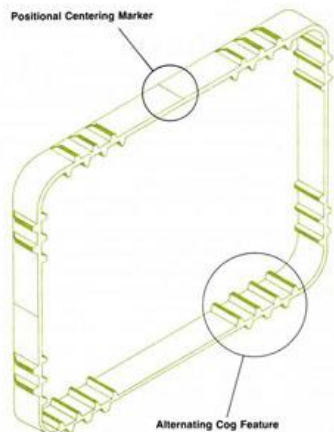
Injection-molded elastomer belt for shock-mounting and alignment of 1980A/B CRT.
